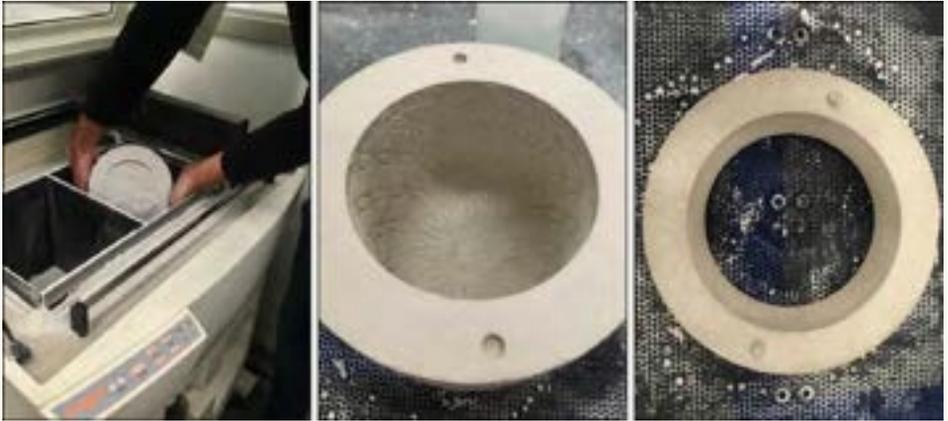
The printed cup mould (bottom piece) is removed from the printer; each piece is sprayed with water and leave to get dry.
